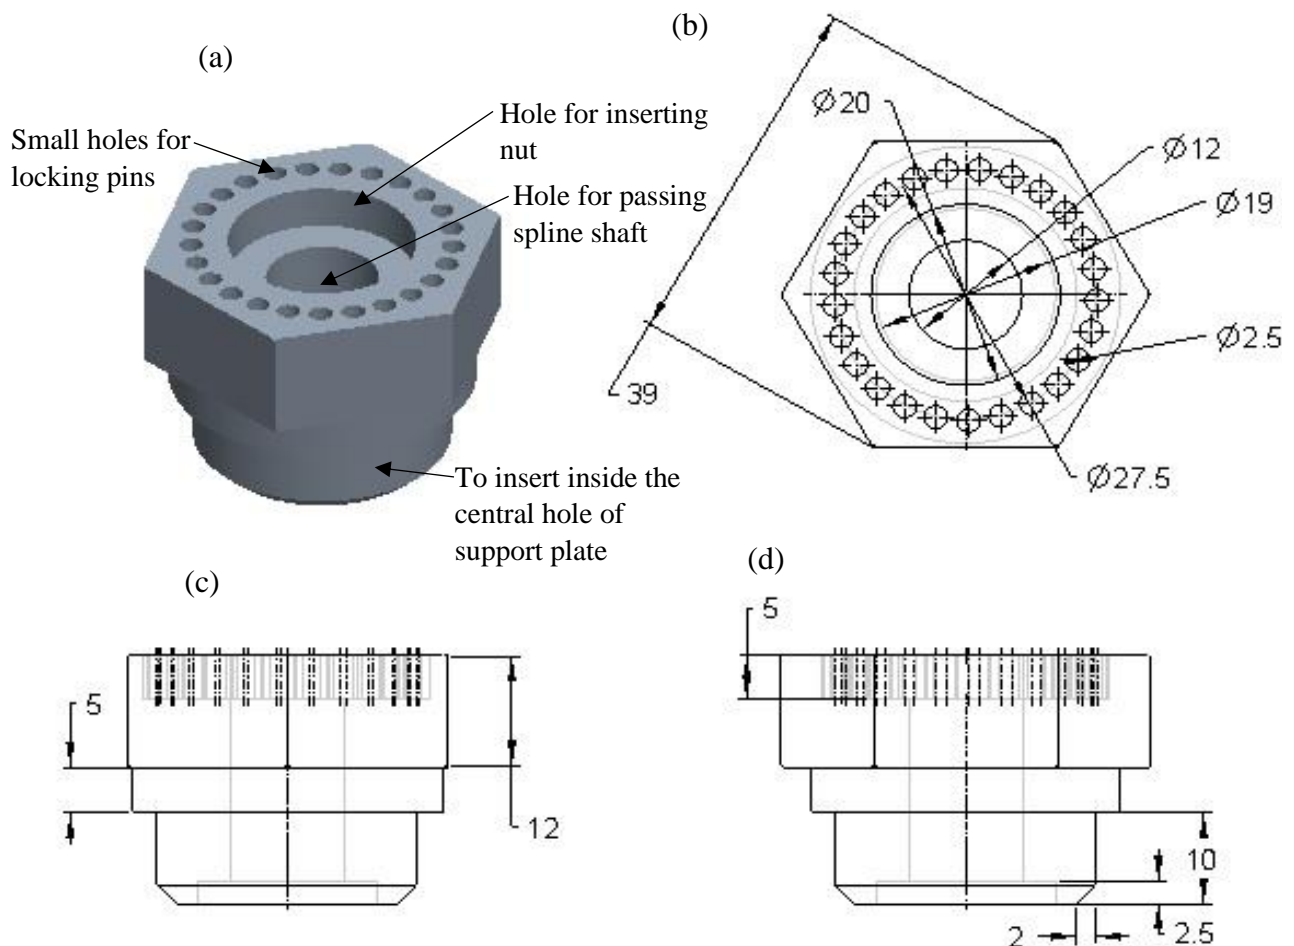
(a) 3-D view, (b) top view, (c) side view, and (d) front view of the 3-D CAD model of locknut.
